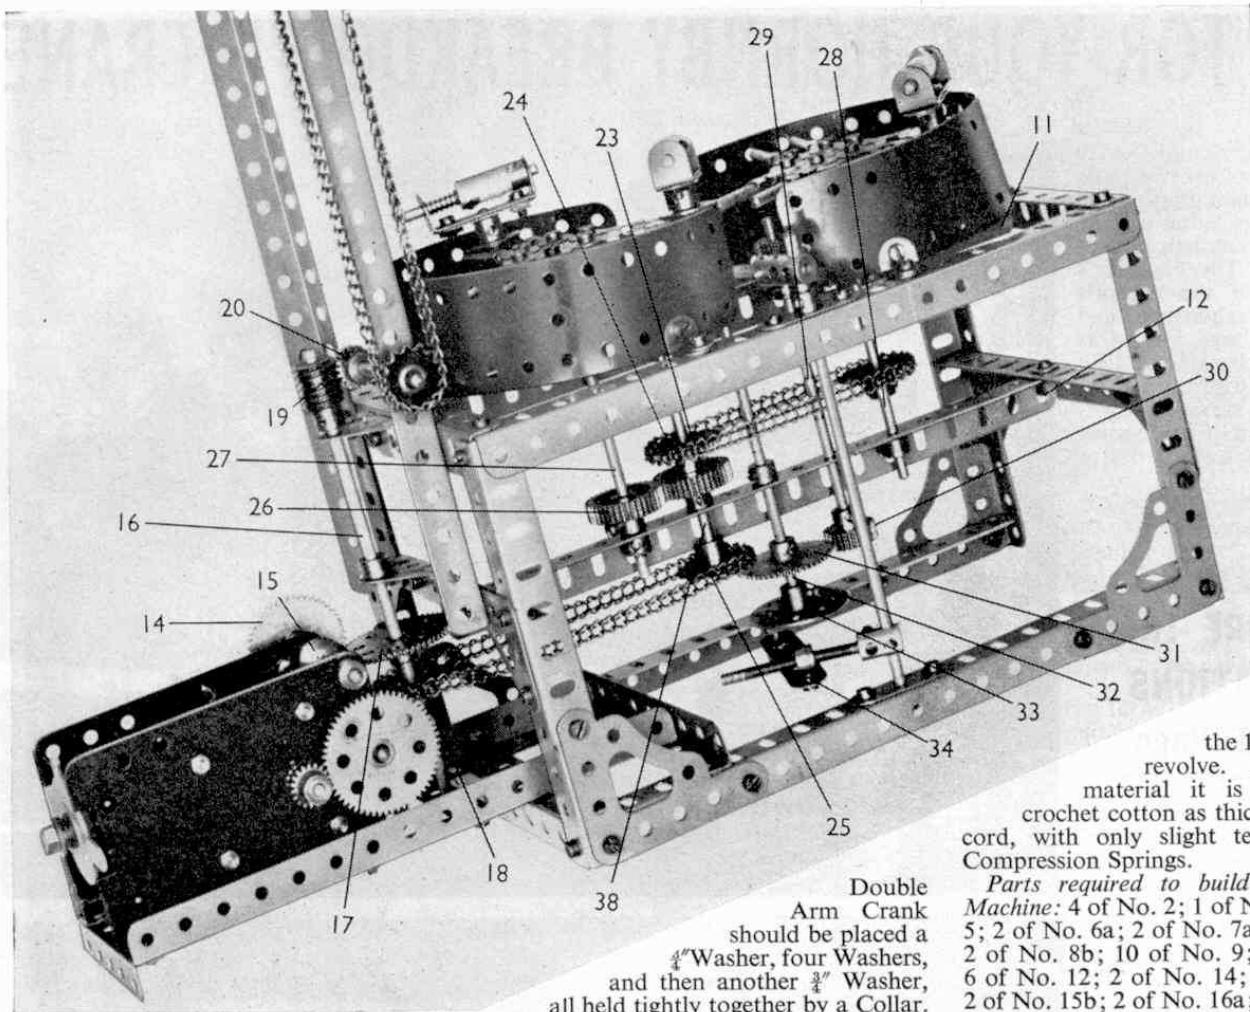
A side view of the Braiding machine showing the gearing that operates the braider heads.
